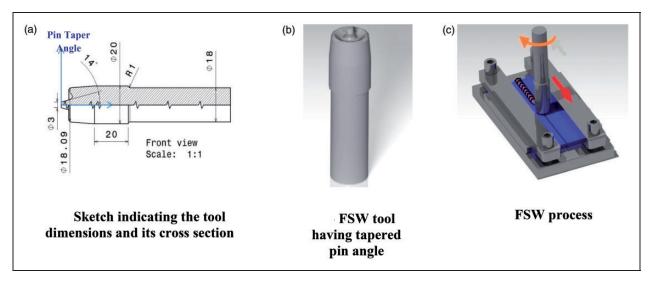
Schematic illustration of the FSW process: (a) sketch indicating the tool dimensions and its cross section; (b) FSW tool having tapered pin angle; (d) FSW process.
